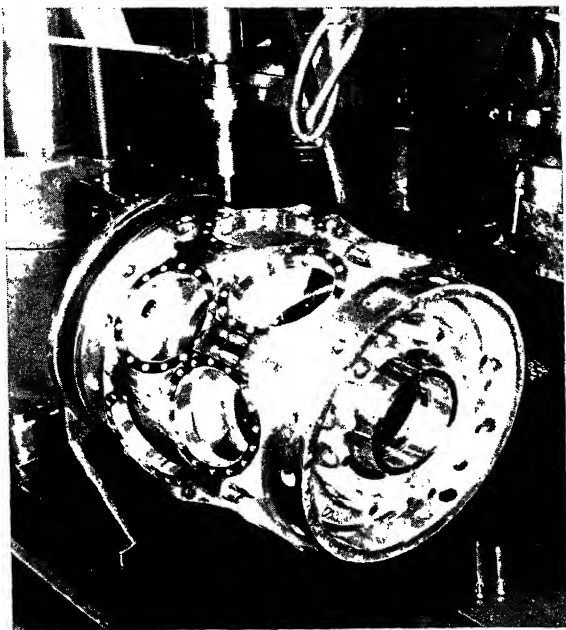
Machining operation on a Pratt and Whitney forged aluminum-alloy crankcase.
